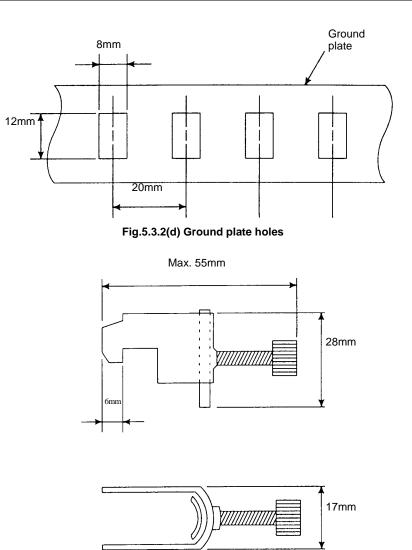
(e) Outer drawings of metal fittings for clamp
